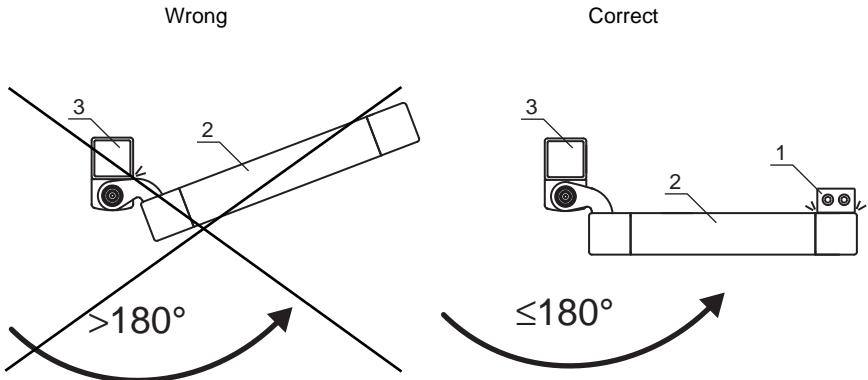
Mechanical limit stop (1) for the moving part of the protective device
